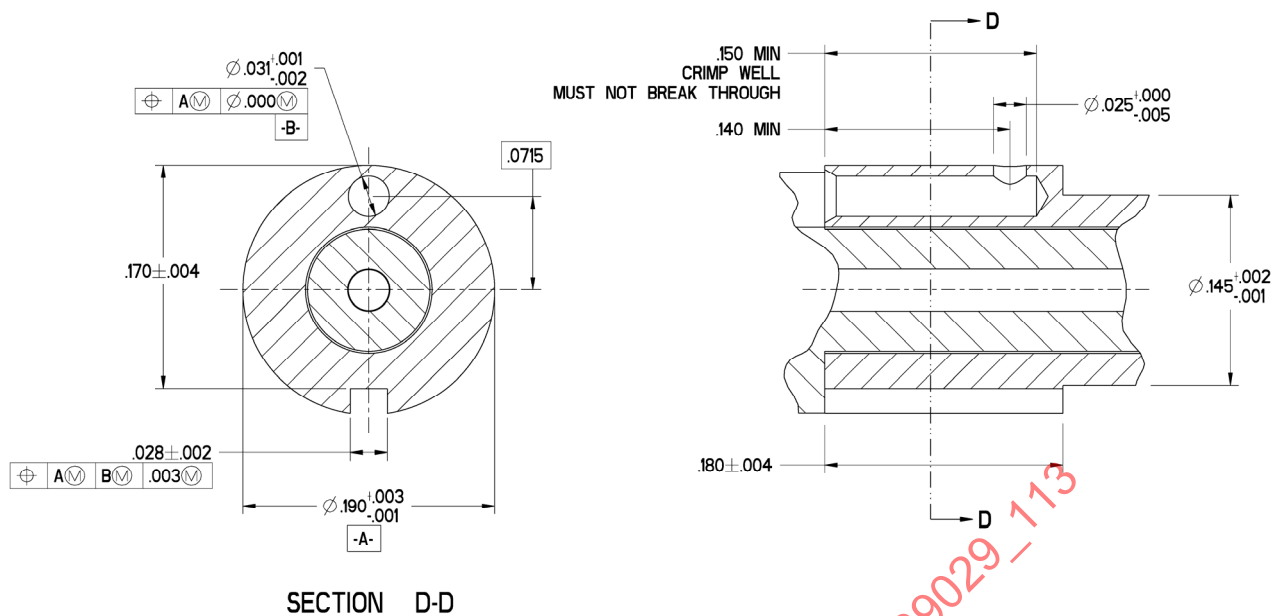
BIN CODE 625: UNASSEMBLED CONCENTRIC TWINAX INTERMEDIATE CONTACT PIECE PART
